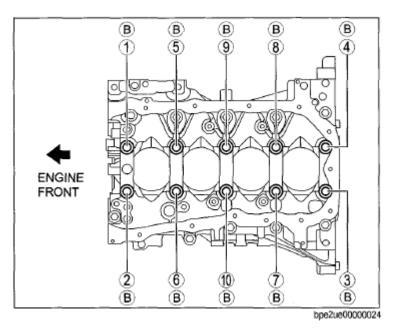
Identifying Lower Cylinder Block B Bolts Loosening Sequence
